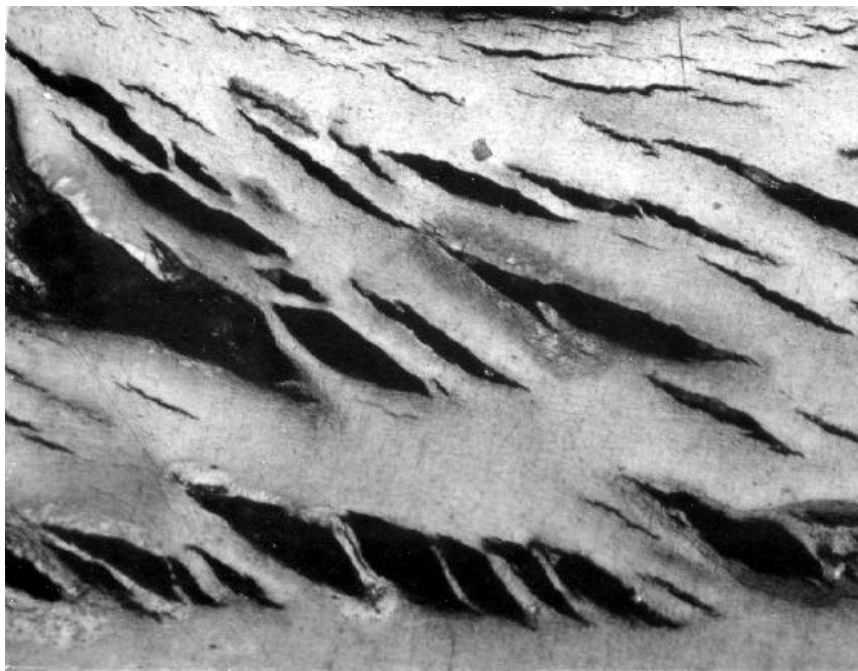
Severe cracking along interior surface of threaded fitting (Neg#54970, 100X)
